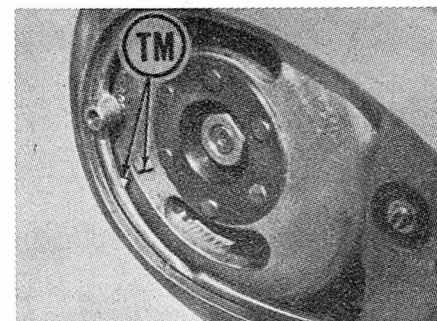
View of the ignition timing marks. The breaker points should just open when the marks align.
